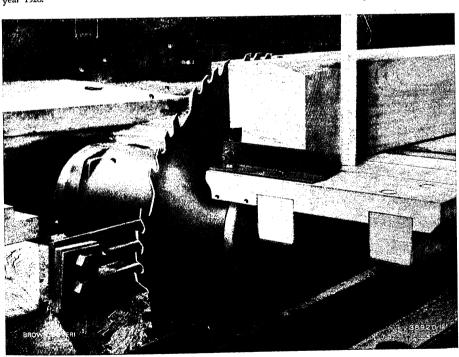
The same saw as in Fig. 1 but with the new drive by a 5.5-kW tool motor.
